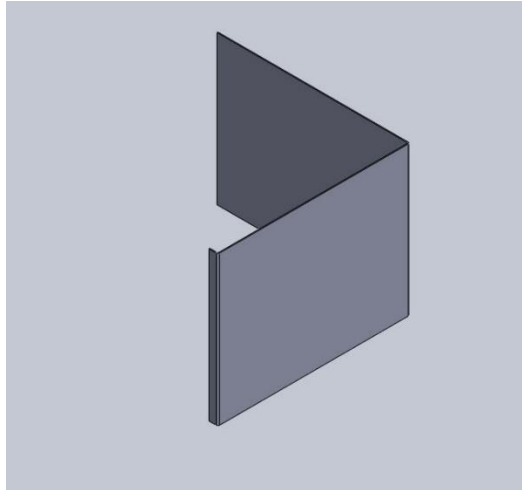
Isometric view of modified part of the Sheetmetal box(folded)
